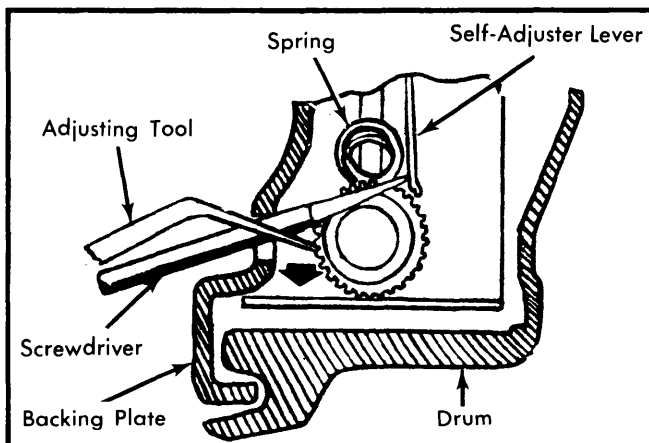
Adjusting Brake Shoe Clearance (Through Backing Plate)
